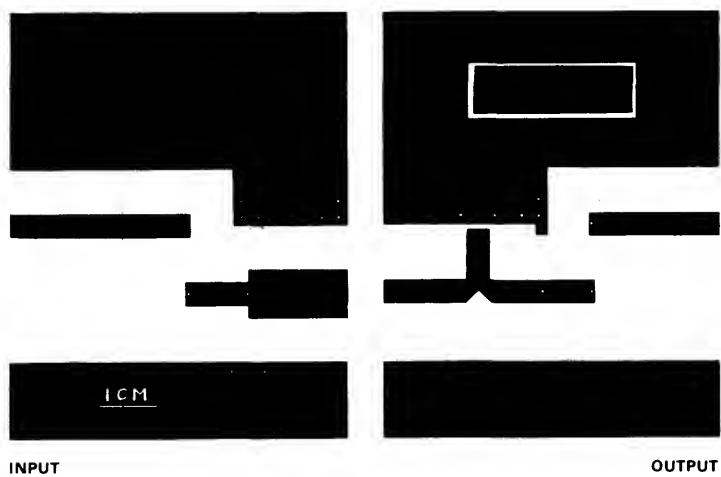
PRINTED CIRCUIT BOARD LAYOUT
